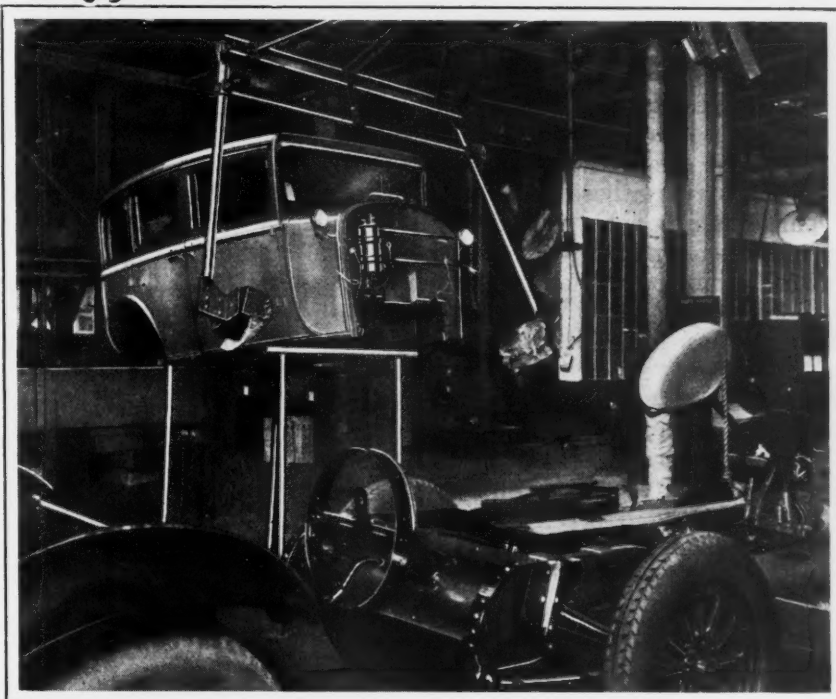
Ready for the Final Step of Mounting a Body on the Chassis
